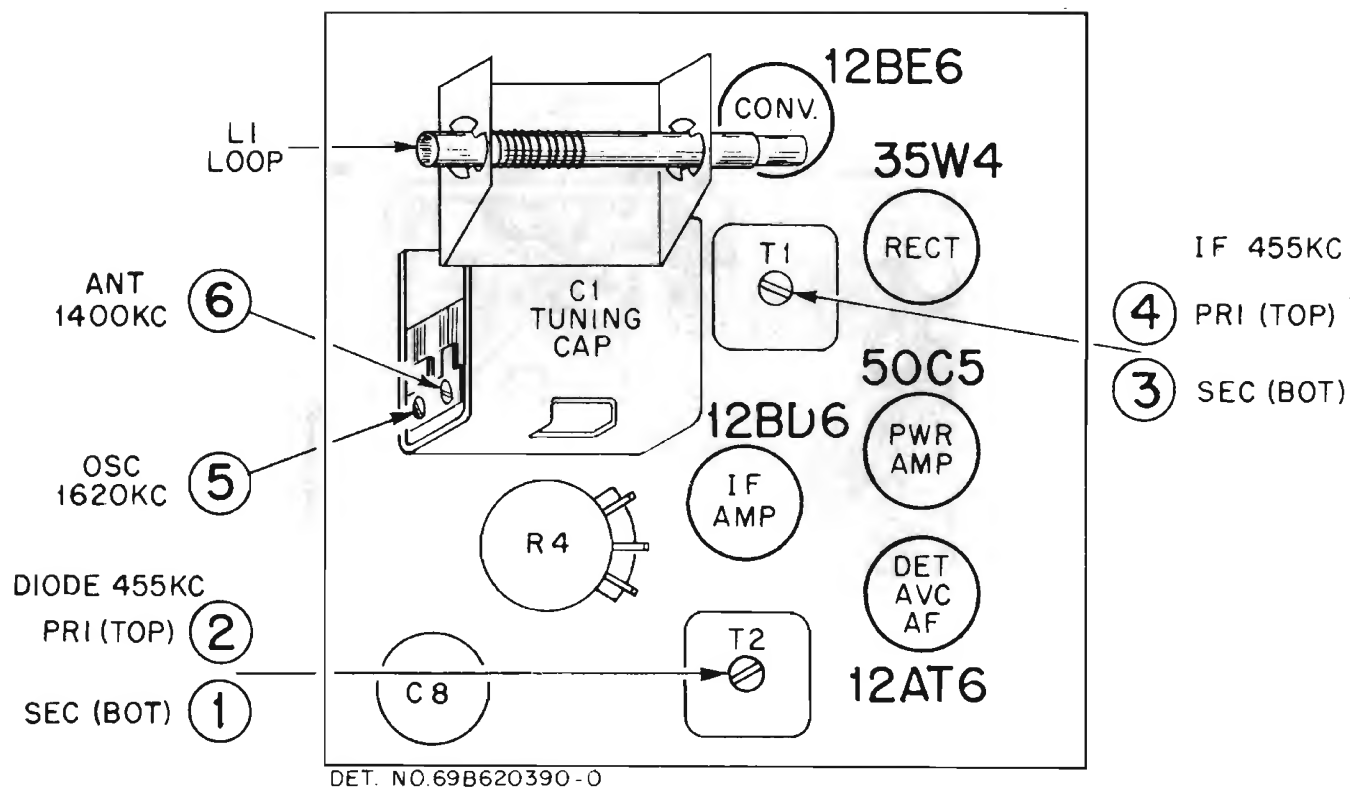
TUBE AND TRIMMER LOCATIONS
